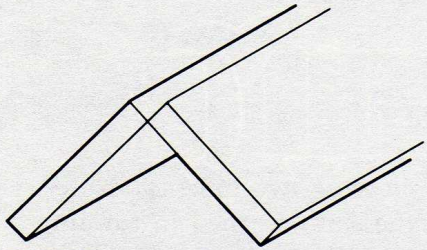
Open corner joint. Most frequently used. Excellent penetration producing a full-strength weld.
